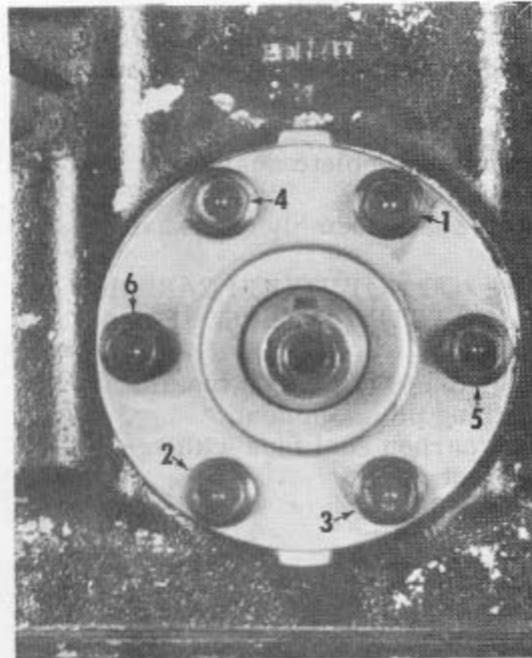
Torque all seal plate bolts in correct sequence to 9-12 ft. lbs.
